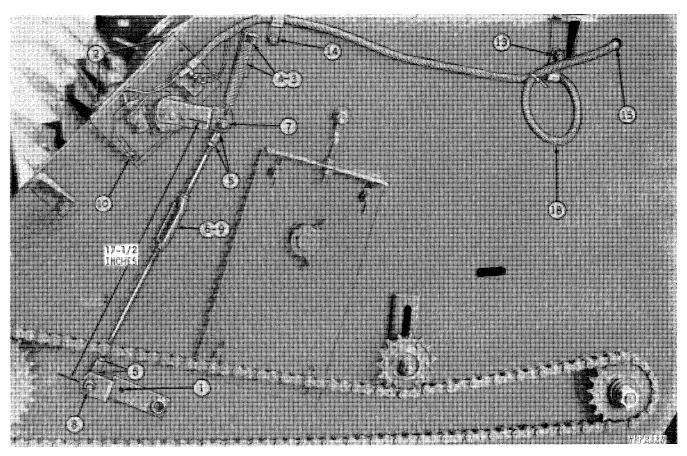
Installing Header Height Control Parts (Outer Sheet Removed for Illustrative Purposes)
